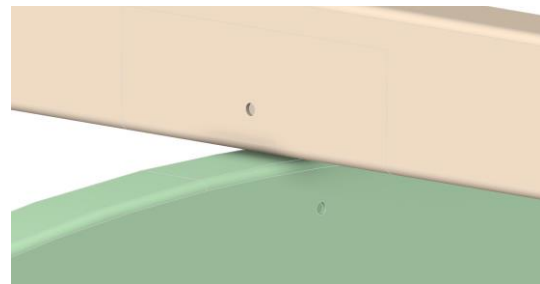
Holes in the ring and stringer, which could be made on site to reassure perfect fit.
